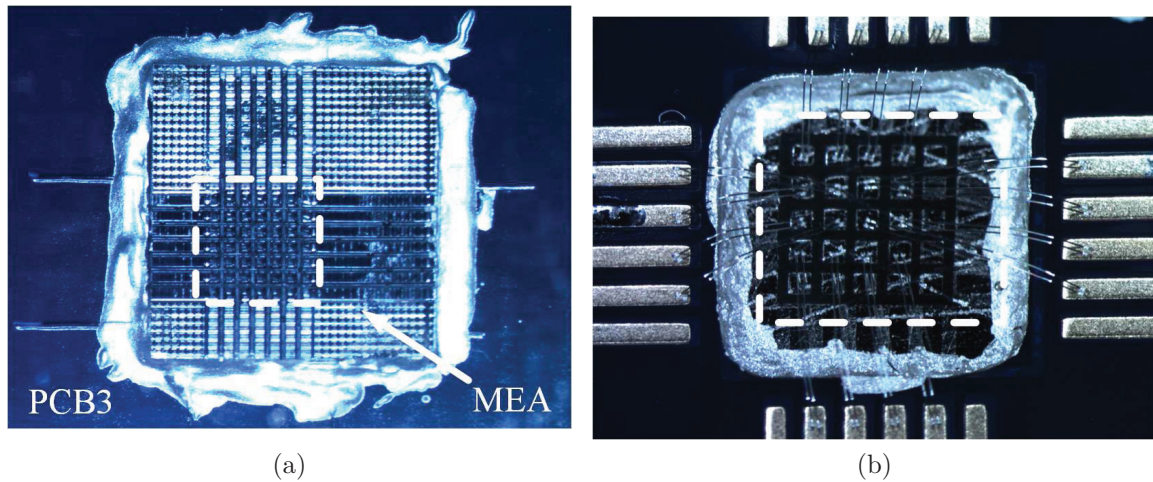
The assembled microstimulator prototype: (a) MEA, glued underneath the opening in PCB3; and (b) MEA pads, wire-bonded to PCB3 pads.
